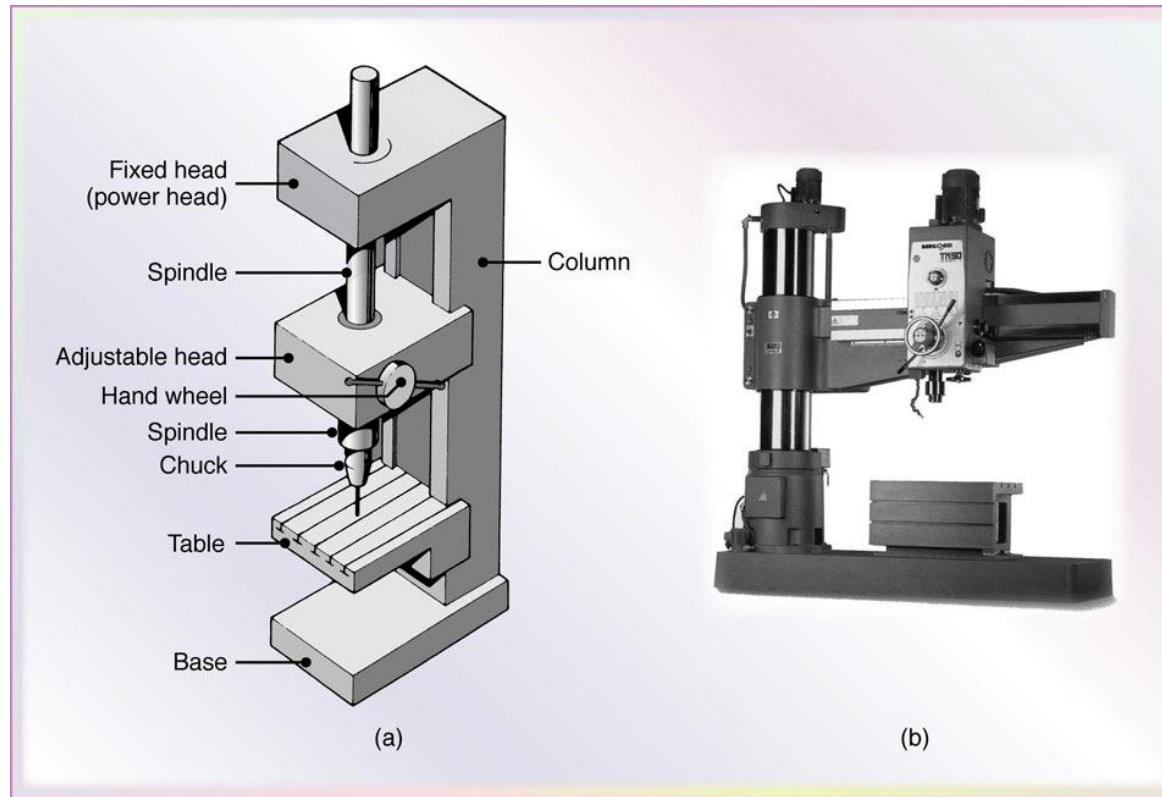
(a) Schematic illustration of the components of a vertical drill press. (b) A radial drilling machine. *Source:* (b) Courtesy of Willis Machinery and Tools.
